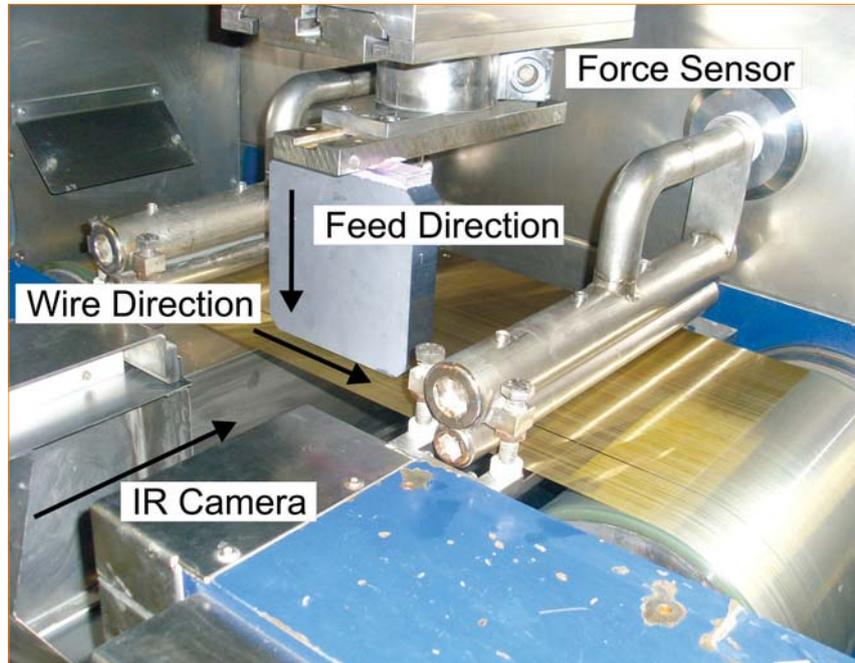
A view into the modified sawing chamber of a Meyer Burger DS 265 wire saw showing slurry nozzles, wire web, feed-in table with mounted force sensor and ingot, and an opening for the infrared camera.
